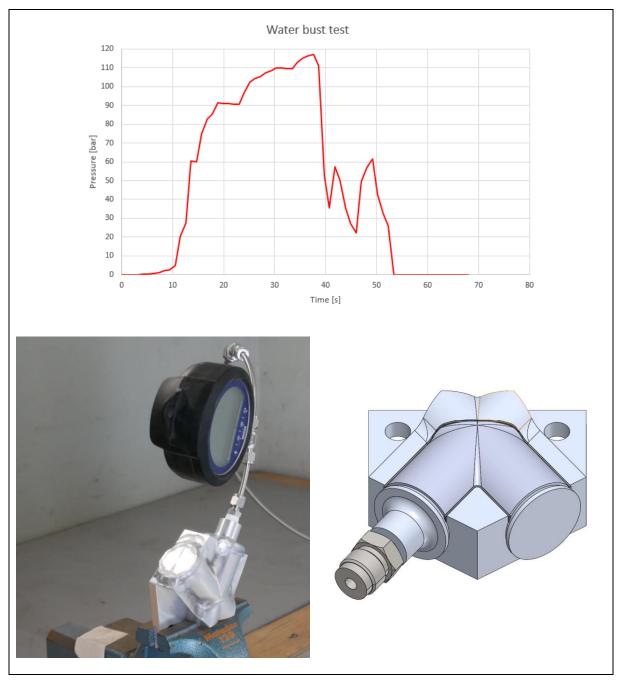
Vacuum vessel welding sample - water burst test
